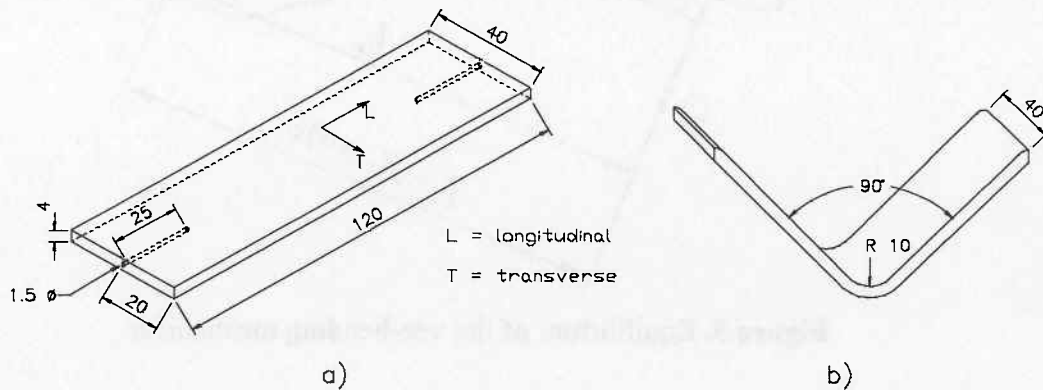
(a) Test sample dimensions, (b) deformed sample.
